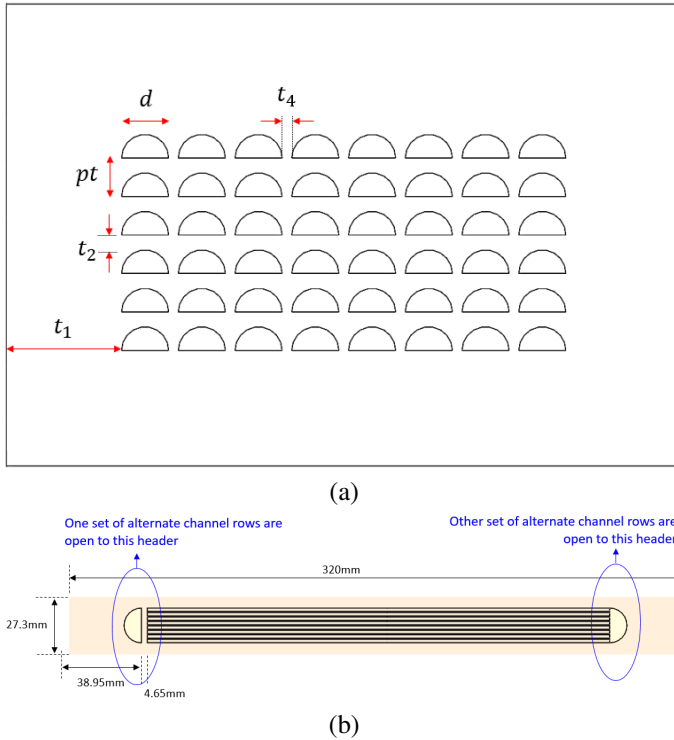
The lab-scaled PCHE specimen designed to perform over-pressure and creep tests; (a) cross section of the specimen, and (b) top view of the specimen showing that the header is integrated to the PCHE core. PCHE dimensions: $pt = 1.55$ mm, $d = 1.9$ mm, $t_2 = 0.6$ mm, $t_4 = 0.4$ mm, and $t_1 = 4.65$ mm
